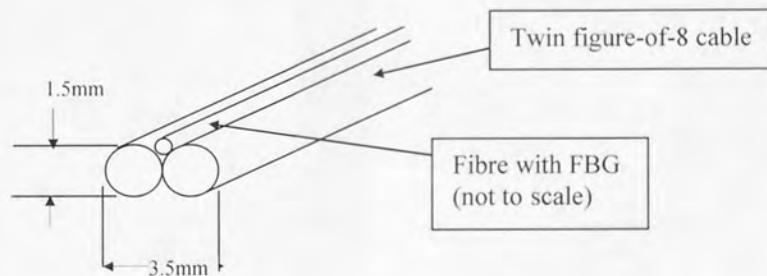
Arrangement of FBG sensor on figure-of-8 cable, epoxy adhesive not shown
